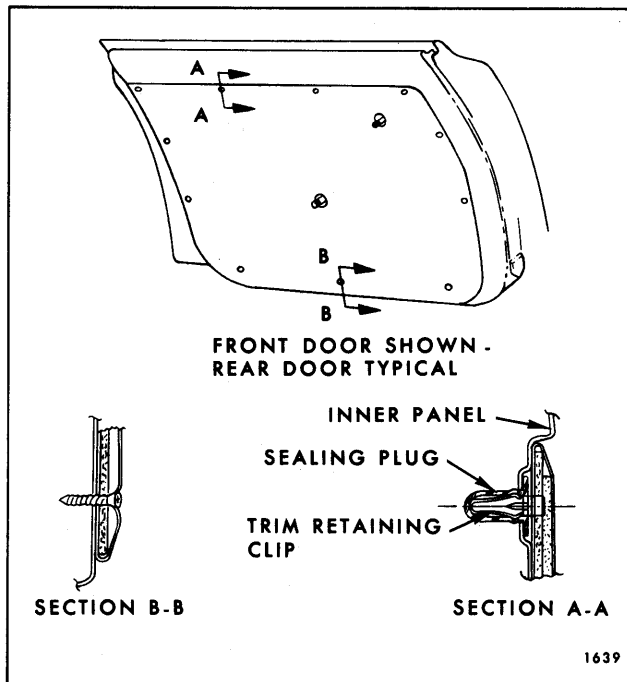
Door Trim Pad Removal - Corvair Styles
